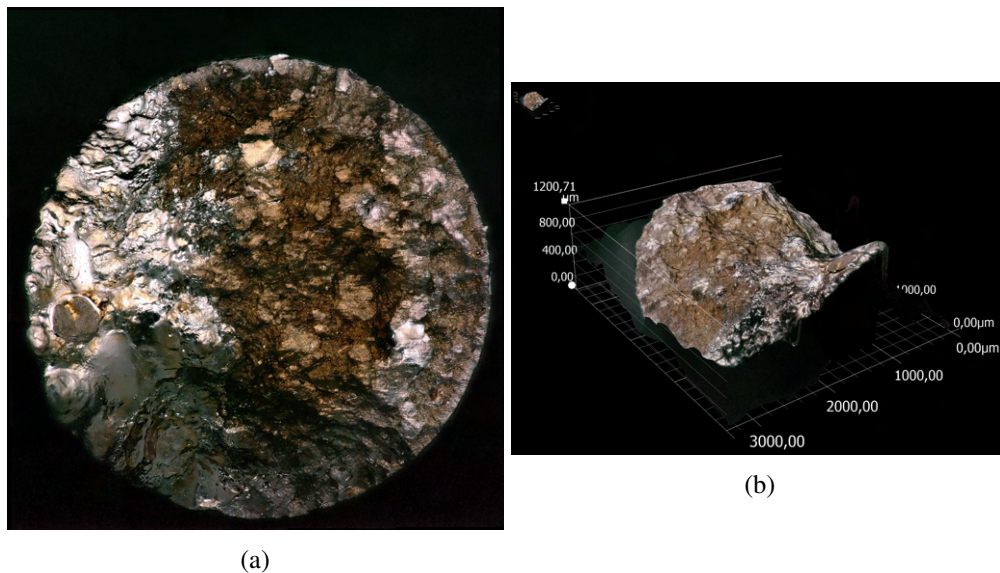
LCF $\Delta\epsilon = 1.4\%$ 150°C test fracture surface
